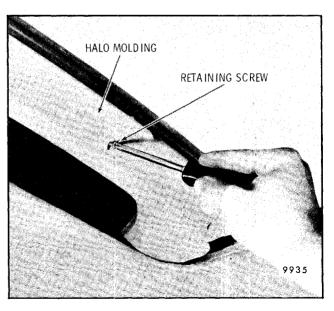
Halo Molding Retaining Screw Removal - C Styles (E and K Typical)
